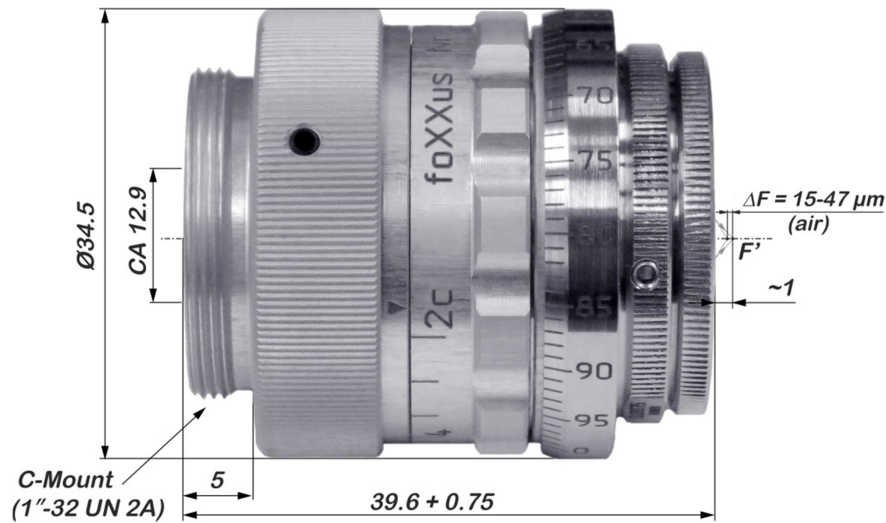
foXXus with overall and mounting dimensions, adapter not installed.
